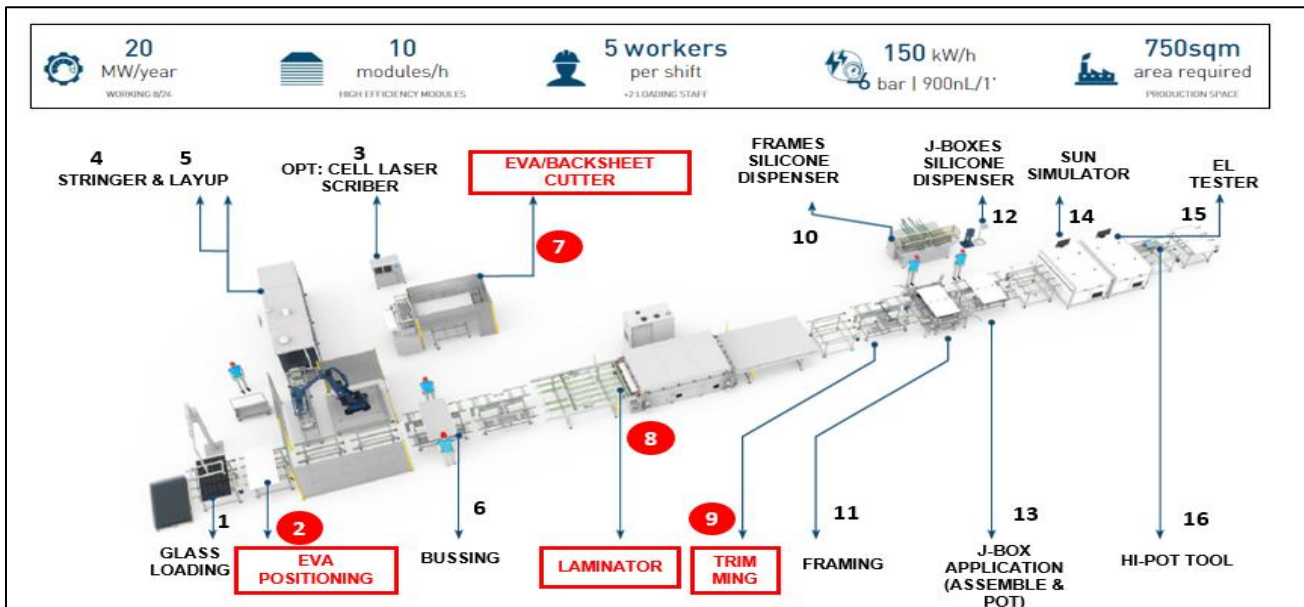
Turnkey line (20 [MW]) for PV module manufacturing and line specs: in red formatting are the assembly operations required only to manufacture laminated solar modules (*Adjusted from [16]*).
